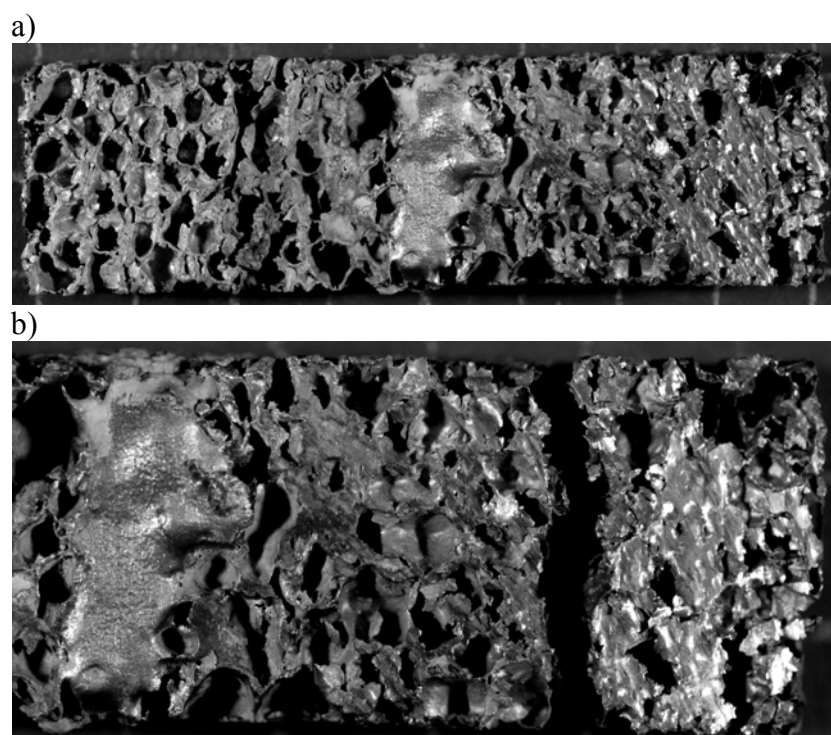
Specimen for static tensile testing of two AlSi foams butt soldered: a) specimen construction, b) specimen destroyed in the test
